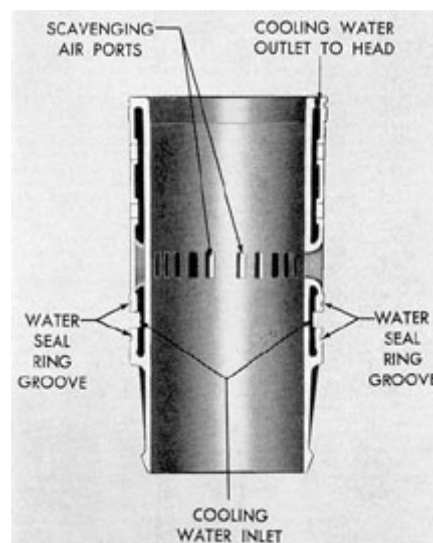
Cross section of GM cylinder liner showing cooling passages.
